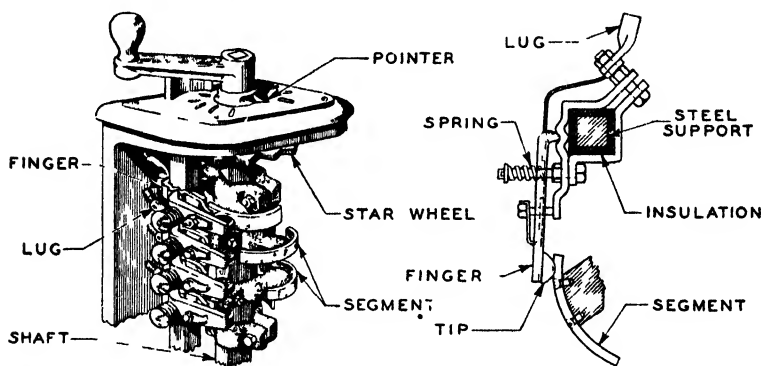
Interior View of a Drum Controller Fig. 6. Detail of Segment and Finger of Controller
